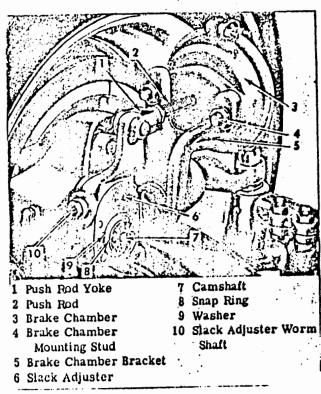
Front Brake Chamber, Bracket and Slack Adjuster Installed on Axle (Typical)
